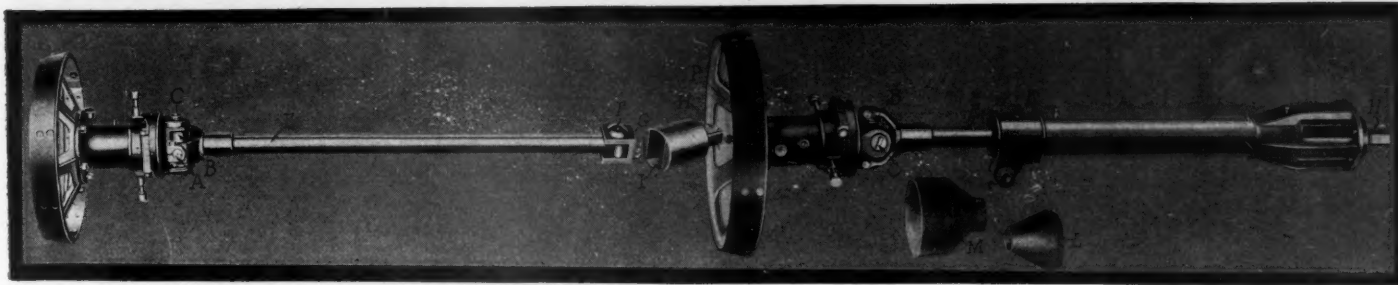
DETAILS OF PROPELLER SHAFT OF REGAL CAR
